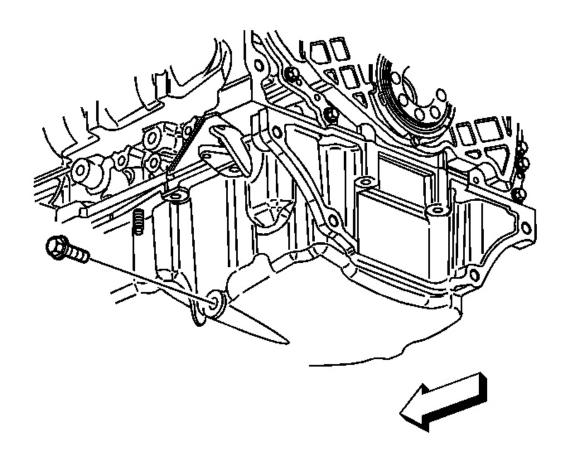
View Of Oil Pan Drain Plug Courtesy of GENERAL MOTORS CORP.
